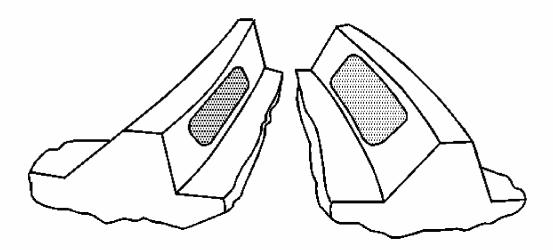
Identifying Correct Gear Tooth Contact Pattern Courtesy of GENERAL MOTORS CORP.
